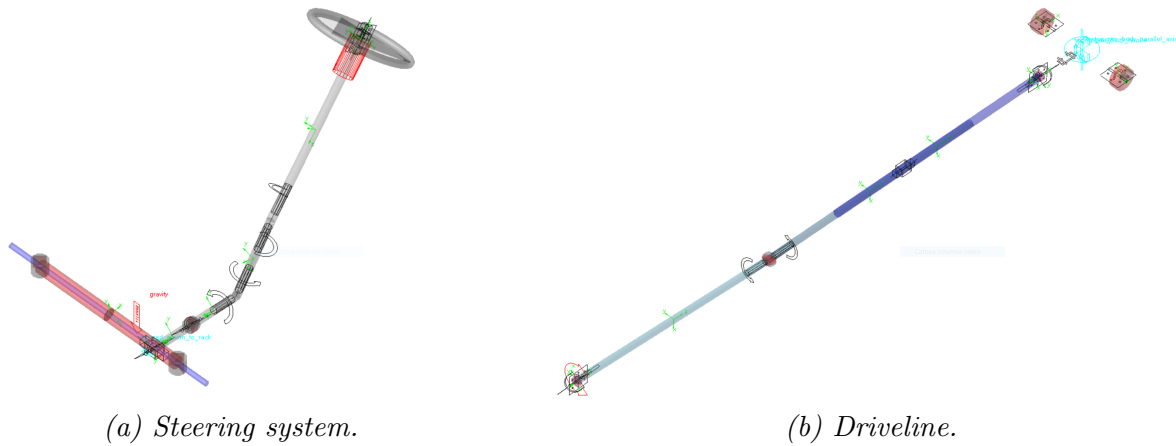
Rear-Wheel-Drive - steering system and driveline.
